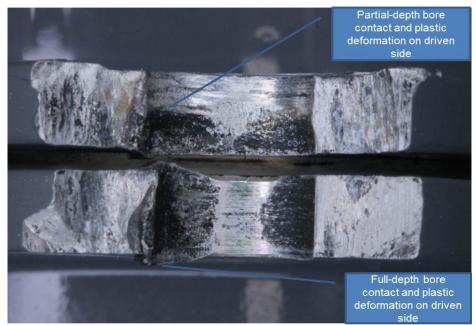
Lobe fractures of retainers; the forward retainer is uppermost.
